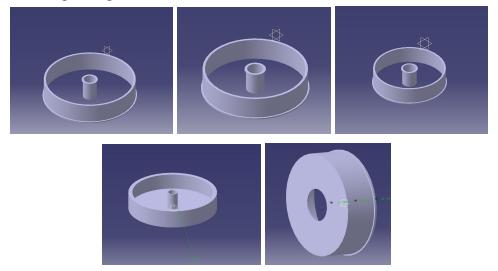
Telescoping Spring Casing for the Stabilizing Jig
